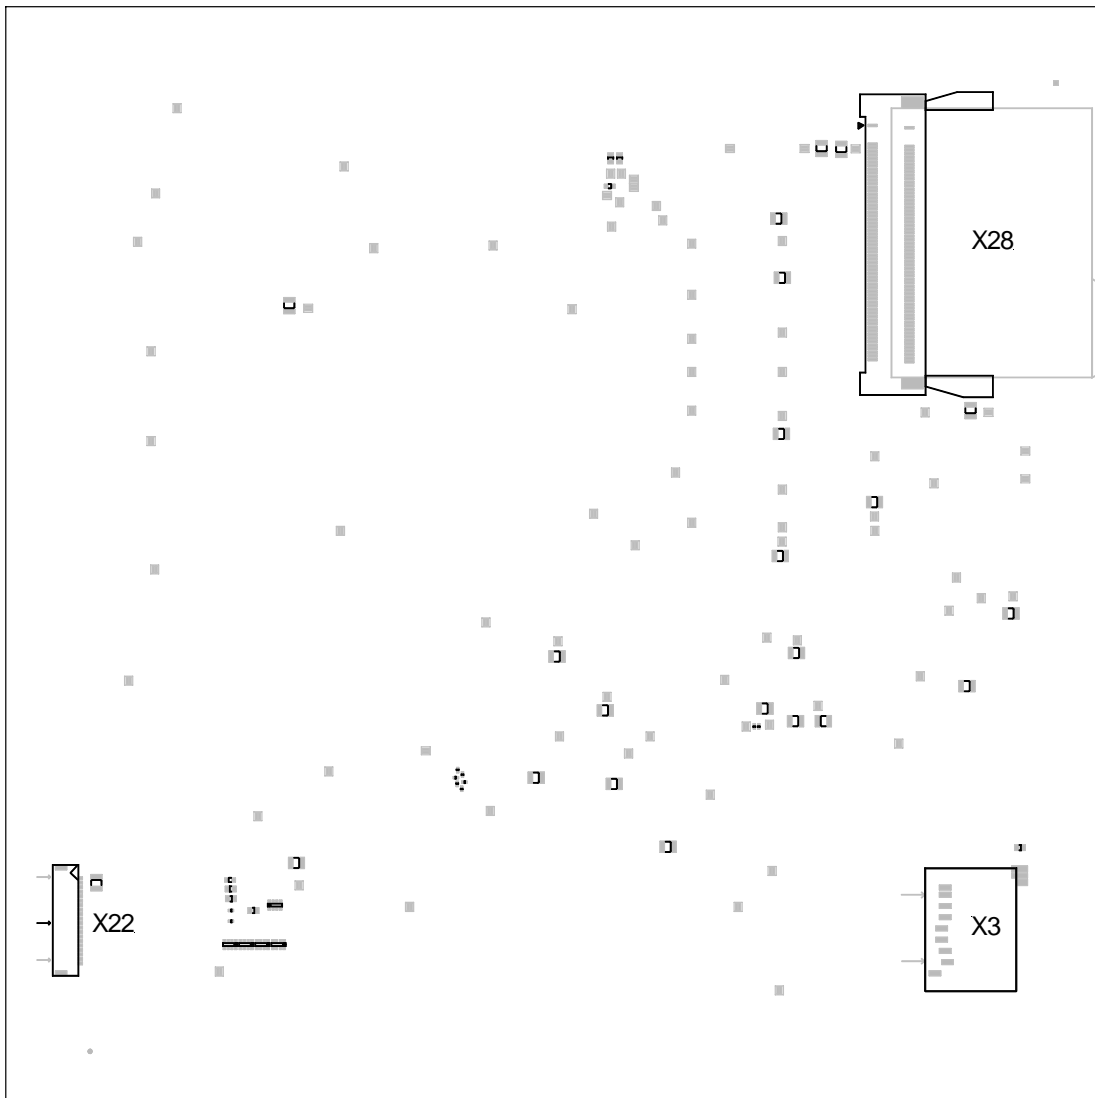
Location of Connectors on the phyCORE-MPC-5121e/3-tiny Carrier Board - bottom side
